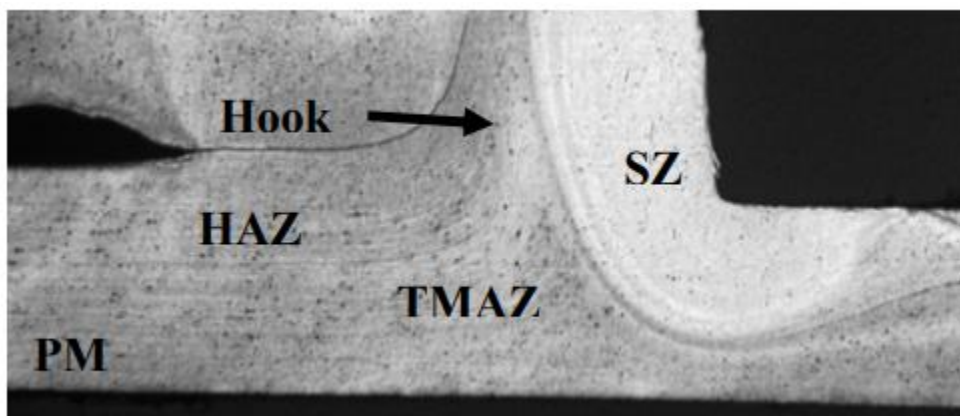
Cross-sectional appearance of a typical Friction Stir Spot Weld
